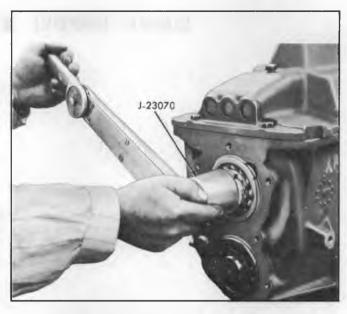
Q--Installing Mainshaft Rear Bearing Lock Nut (4-Wheel Drive Only)
